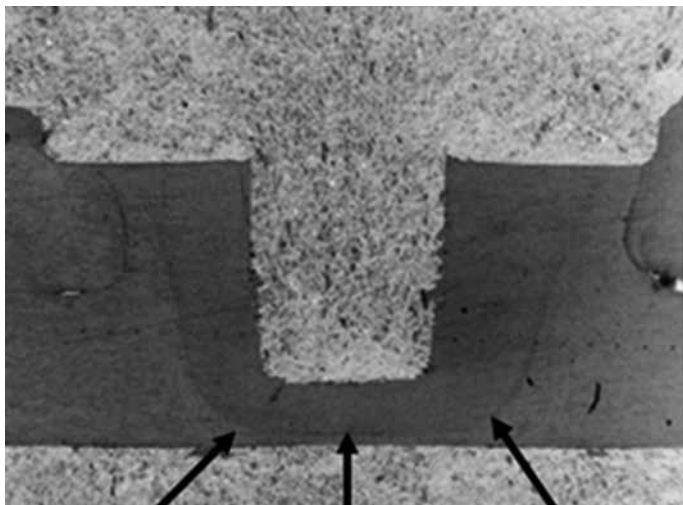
Macrography cross section of the welding point probe 0511-7.
